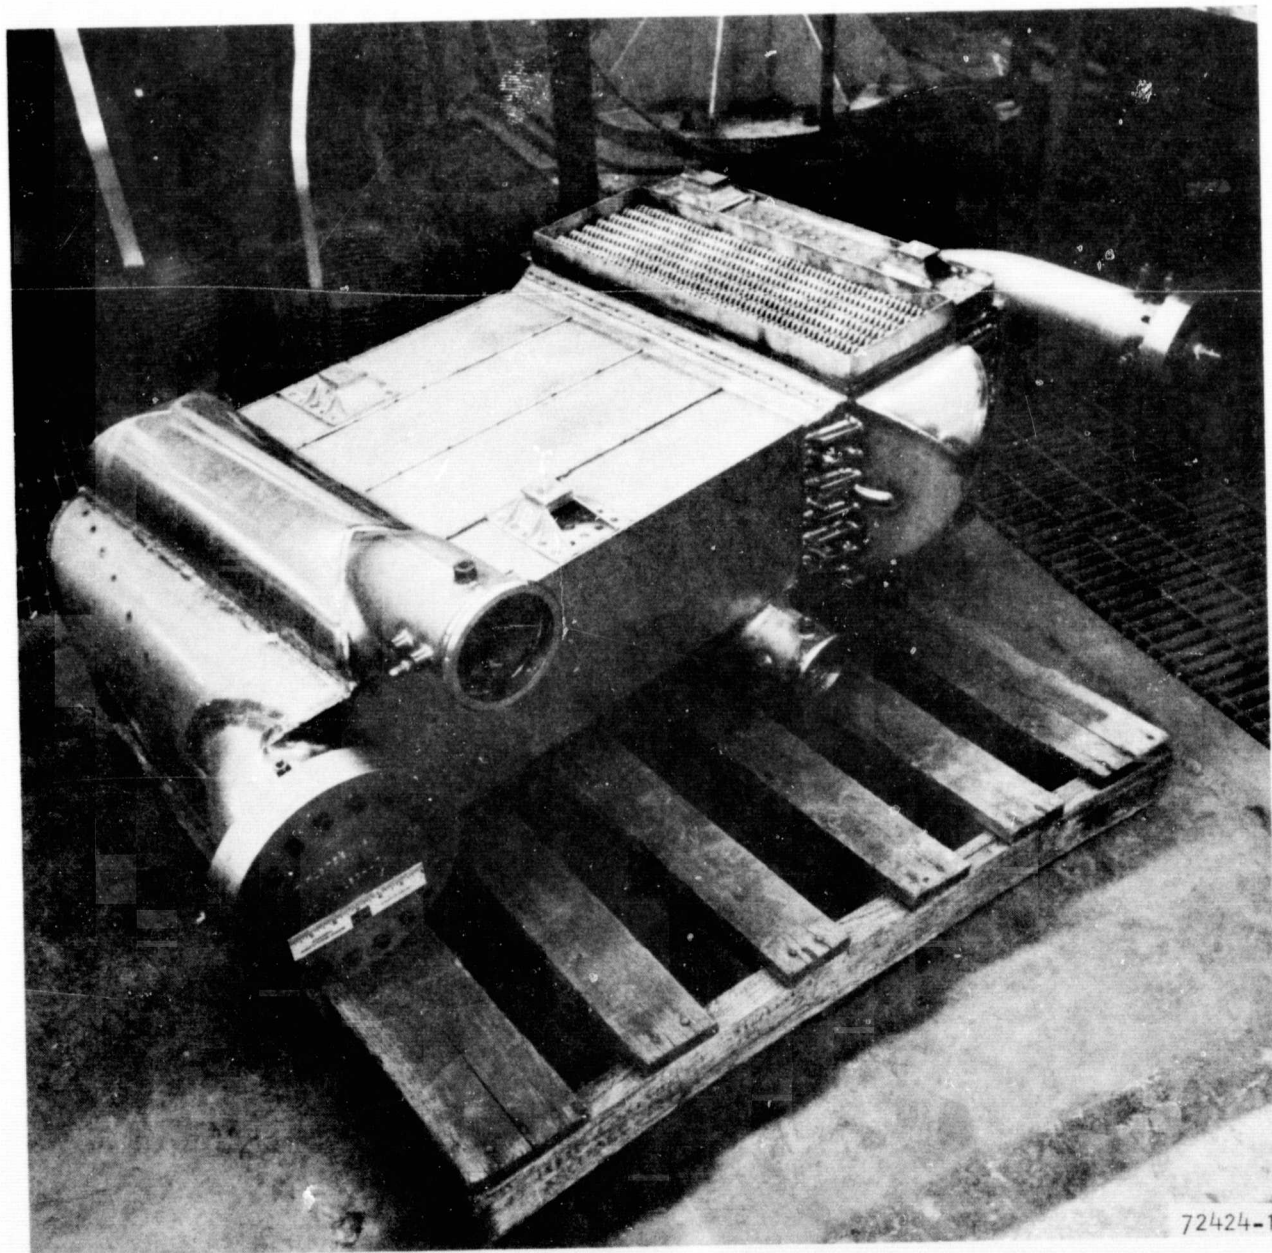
BHXU-Alternate Heat Exchanger and Ducting Assembly during Final Assembly
